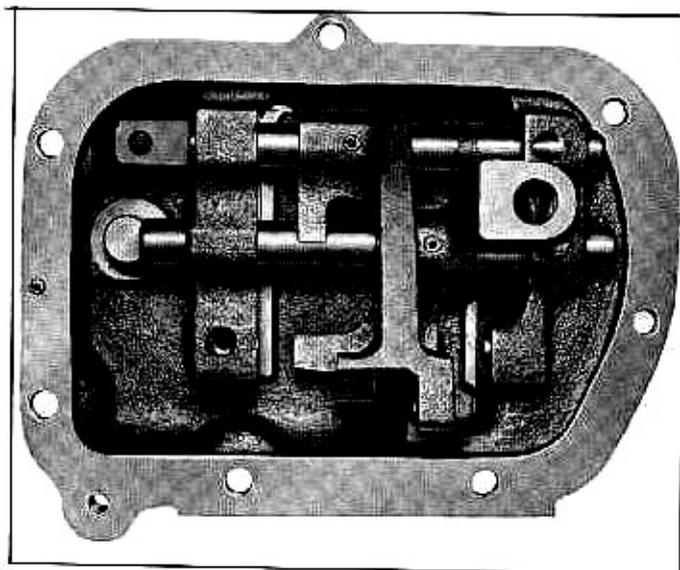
B—Reverse Shifter Shaft & Head Installed to Cover
